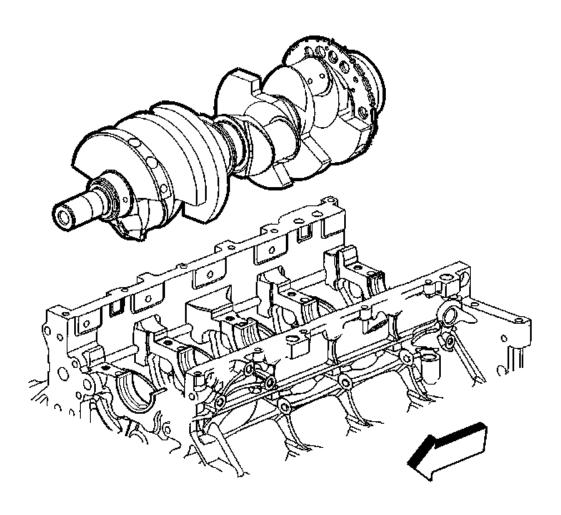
View Of Crankshaft & Engine Block Courtesy of GENERAL MOTORS CORP.
